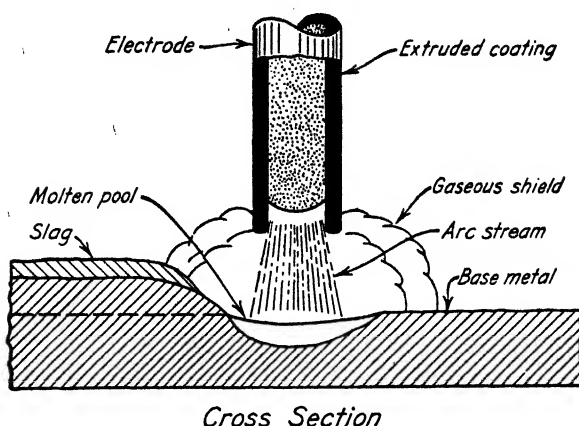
Shielded arc electrode. From H. Malcolm Priest, *Practical Design of Welded Steel Structures*, American Welding Society.
